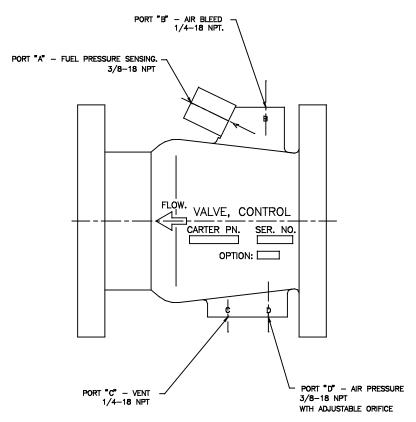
64124/64080 IN-LINE CONTROL VALVE
